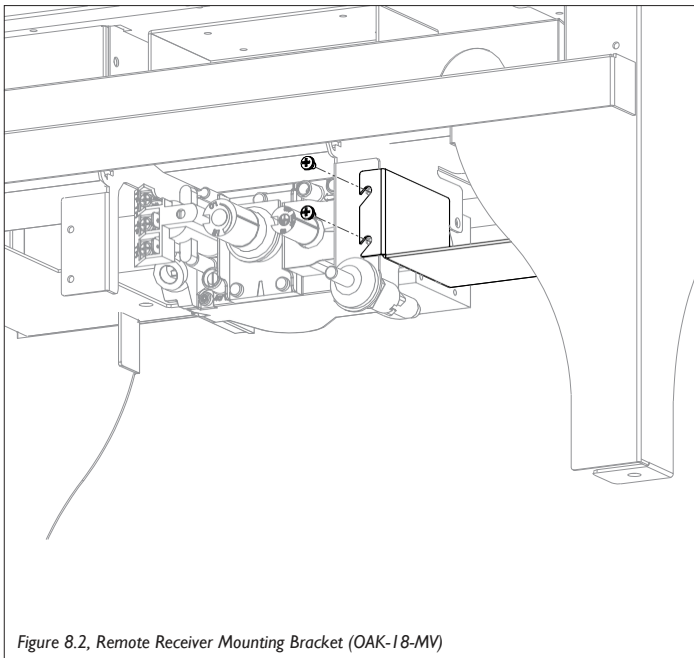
, Remote Receiver Mounting Bracket (OAK-18-MV)
